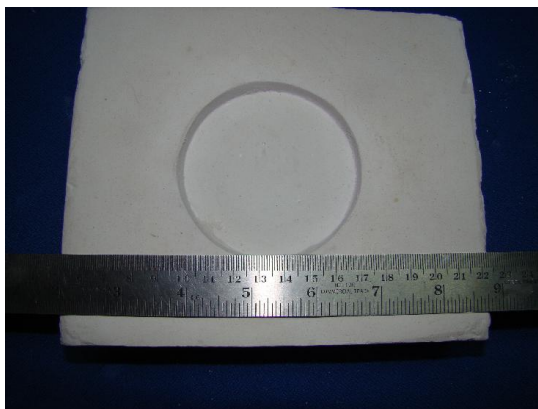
The photograph of the mould fabricated for the slip casting of TAT-5 formulation
